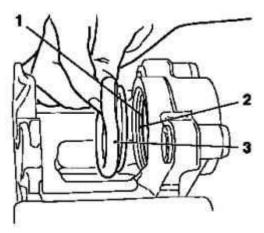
Install the new seal ring: 1 - O-ring, 2 - edge, 3 - groove
